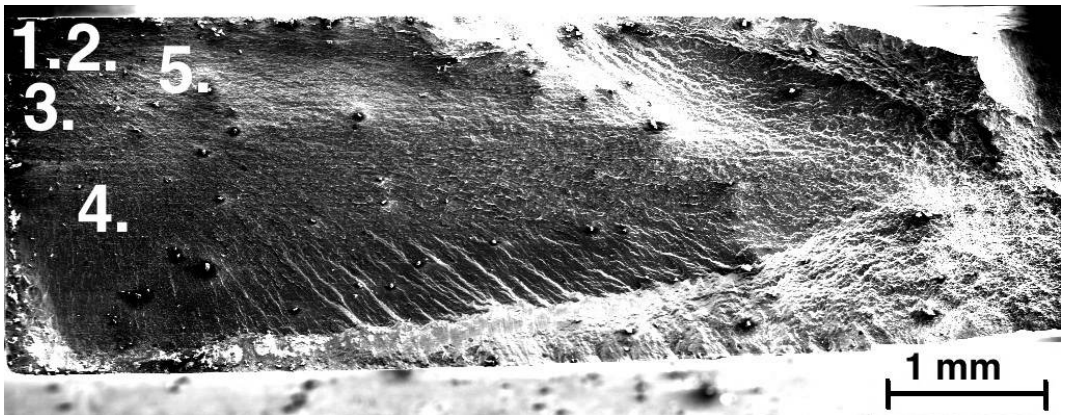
Overview of the fracture surface AA6082.50-T6 as welded specimen with most cycles to fracture. The numbers represent the different areas investigated further below.
